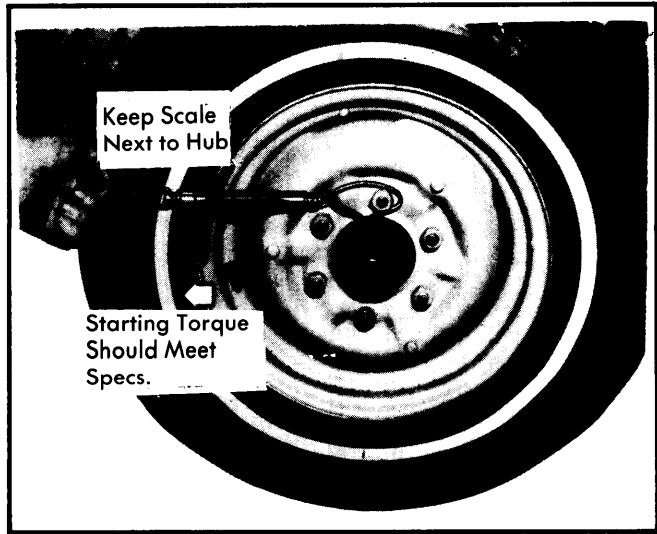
Using a Pull Scale to Measure Toyota Wheel Bearing Starting Torque
